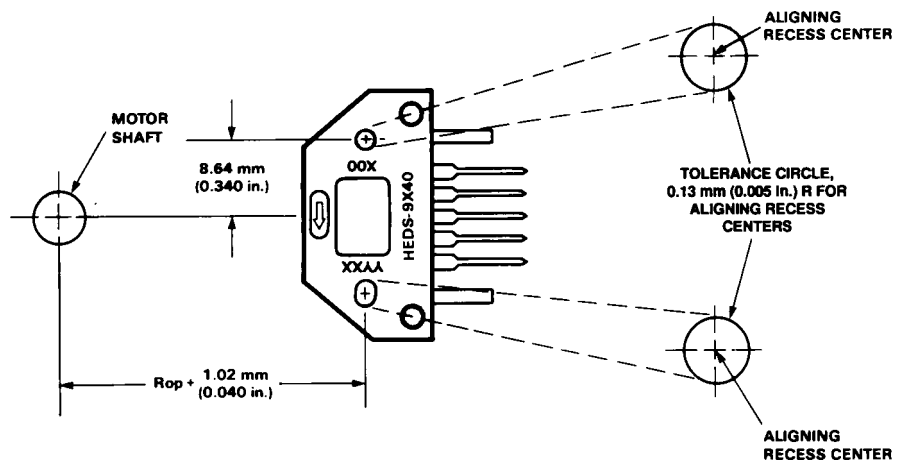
HEDS-9X40 Mounting Tolerance.
